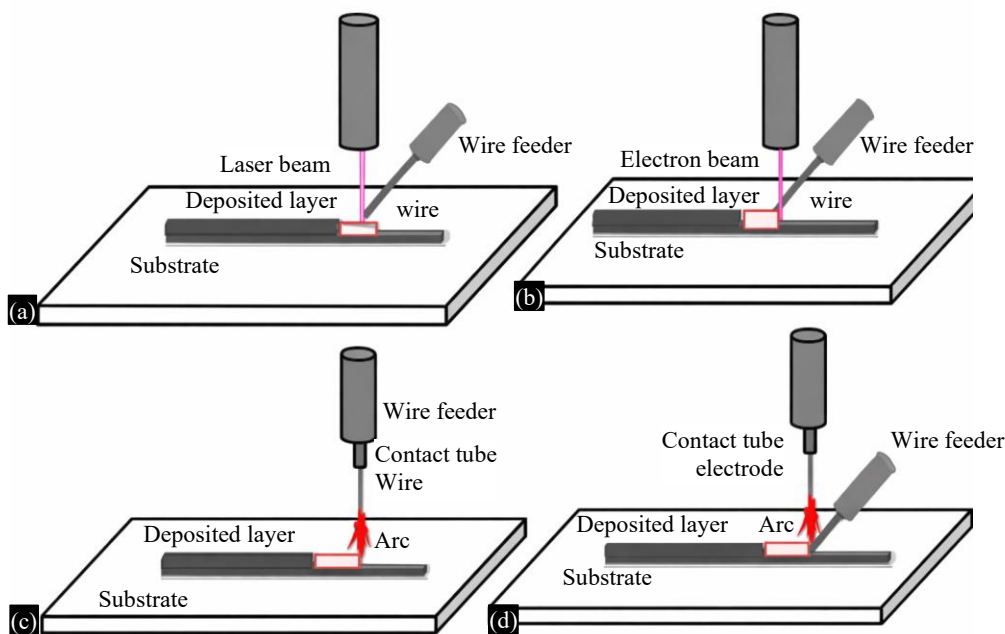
Wire-feed additive manufacturing (a) laser-based, (b) electron beam-based, (c) arc-based Gas metal arc welding (GMAW), and (d) arc-based gas tungsten arc welding (GTAW) techniques for additive manufacturing.
